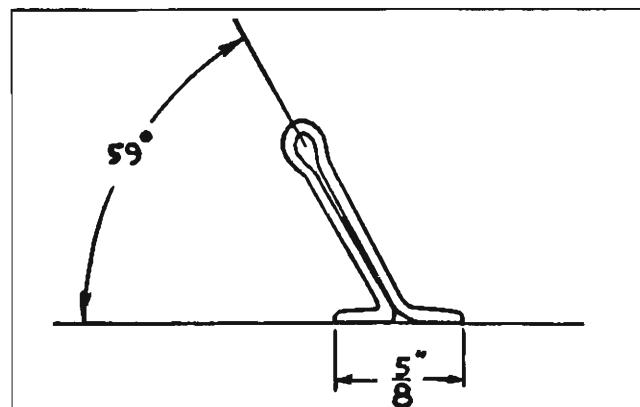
Tool for Removing Upper Half of Main Bearing
